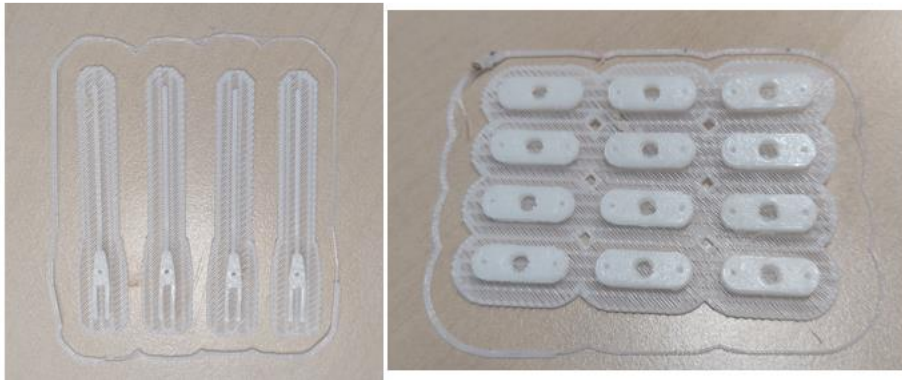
Printed Parts of Sliding Lever and Motor Supporting Base
